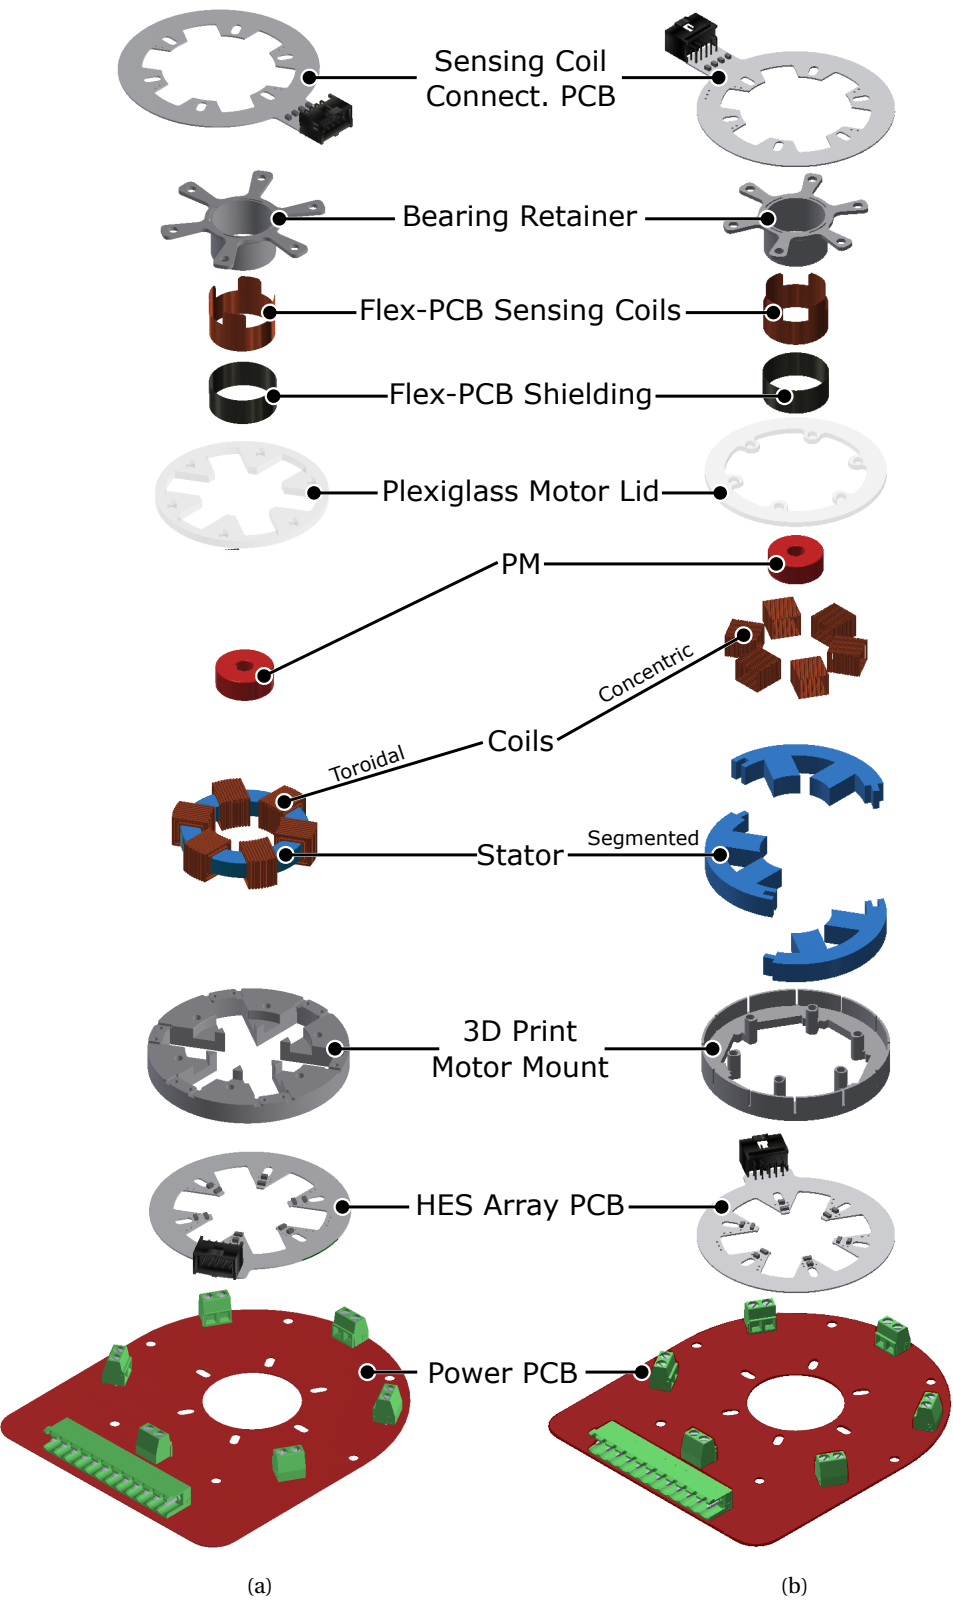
Axial mounting concept of the sensor, mechanical, and drive pieces for the slotless and slotted drive.
